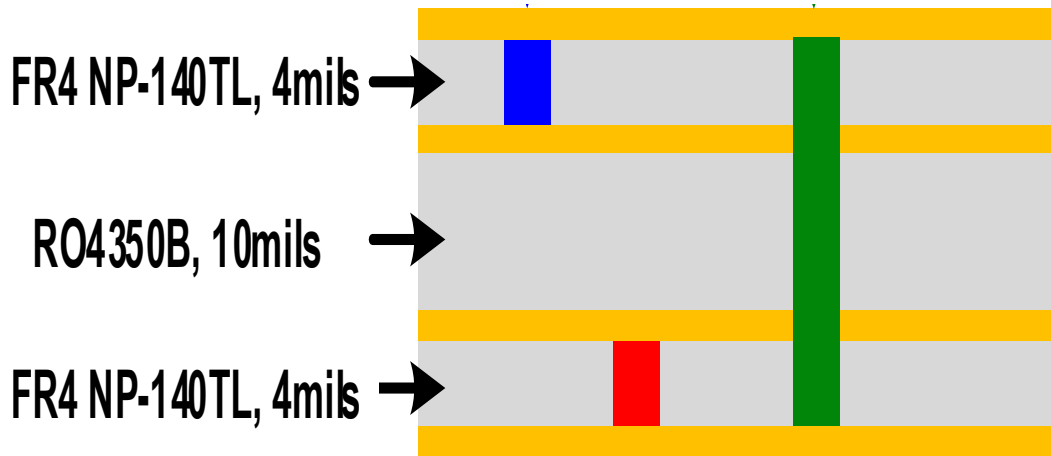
4-layer FR4-Rogers hybrid PCB stack-up
